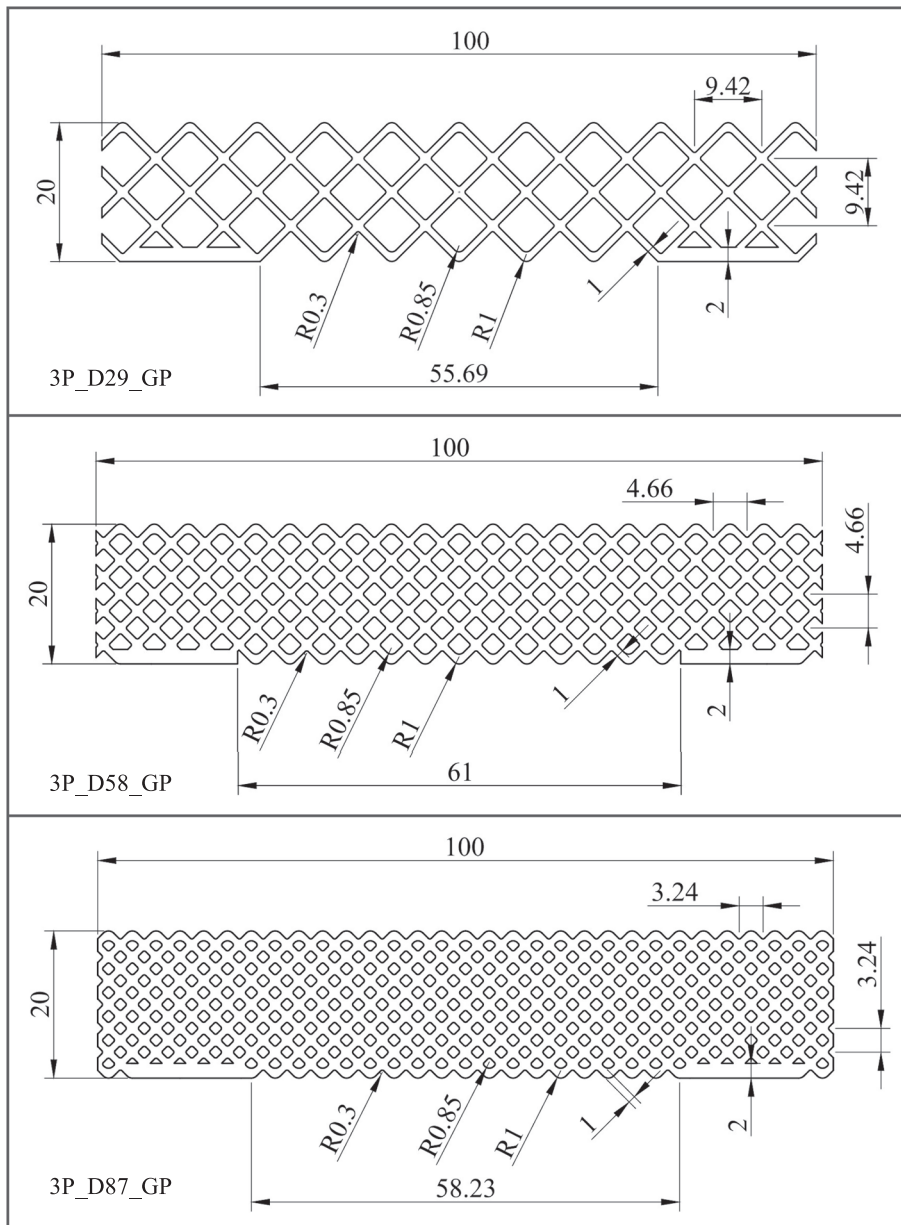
Dimensional drawings of GP specimens (8 mm thickness).
